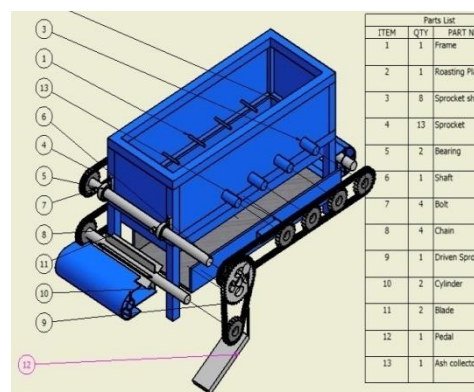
Exploded View of Multi- Purpose Roasting Machine.
